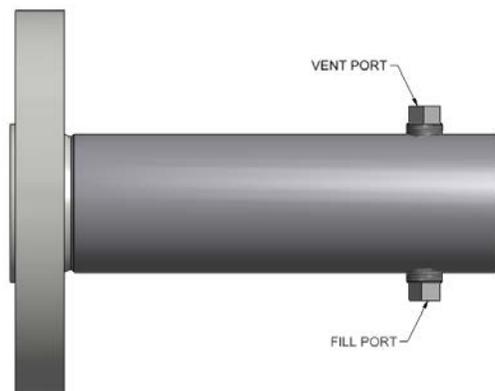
3/4" and 1" GripTight Reverse Pressure Test Plug Flange Cap Assembly
